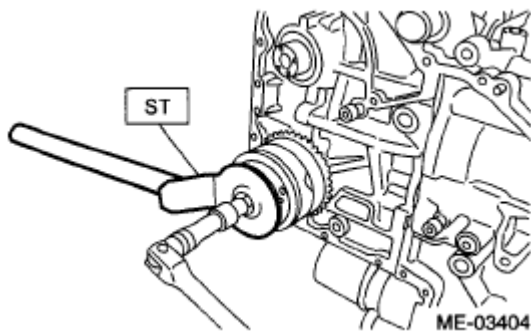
Identifying Cam Sprocket Wrench (Exhaust Side)
